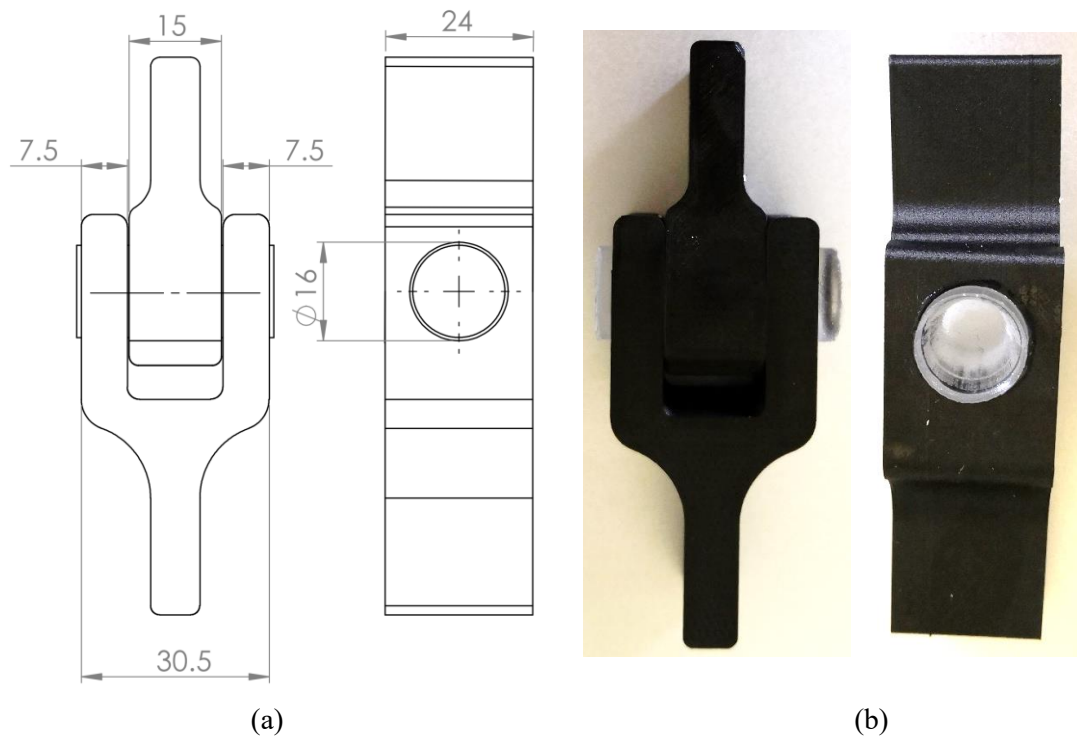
Schematic of the test rig with dimensions (not to scale) and 3d printed test rig with pure elastomeric specimen.
